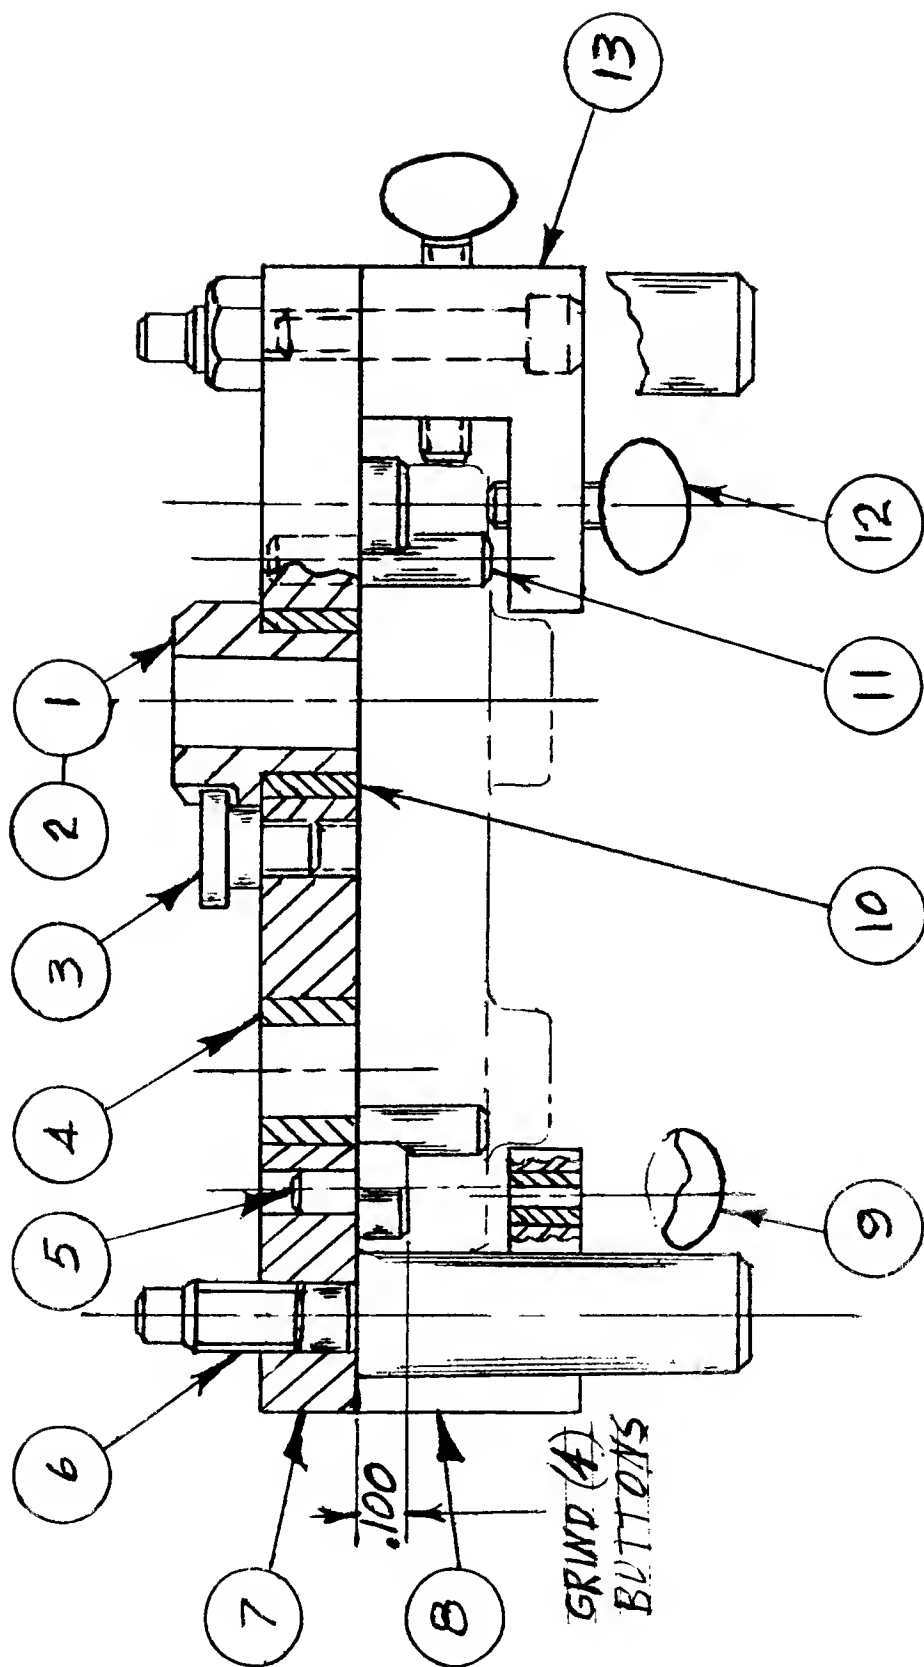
Drill Jig Layout Drawing (Side View)
